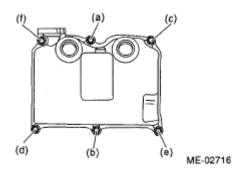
Identifying Rocker Cover Bolts - LH Side Courtesy of SUBARU OF AMERICA, INC.
